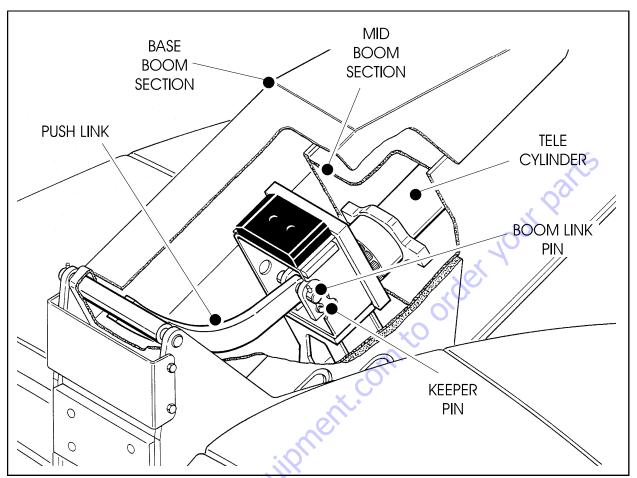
Boom Assembly Cutaway - Sheet 3 of 3
